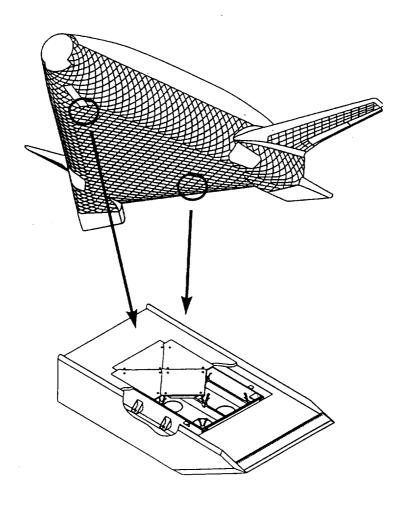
Sketch of Panel-Holder Sled with Metallic TPS Assembly.
